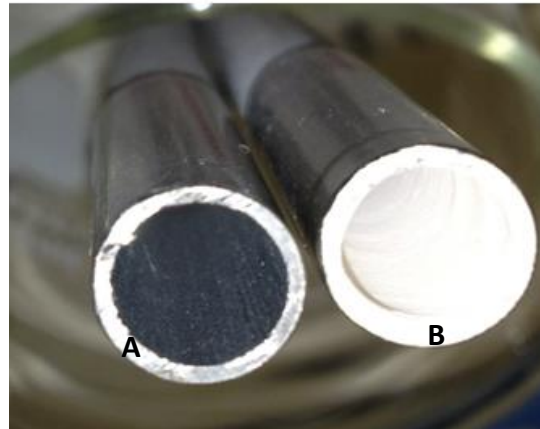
Stainless steel tubular supports A) before coating B) after coating
